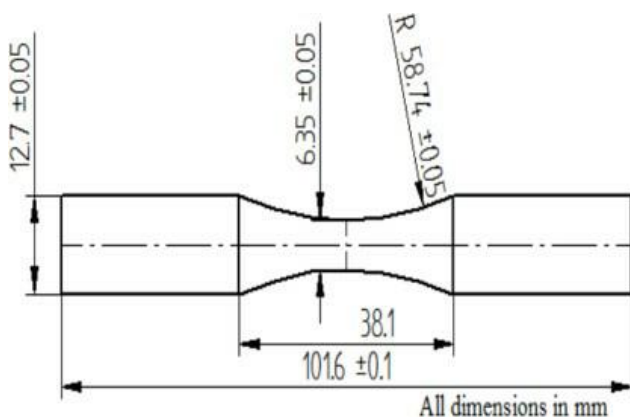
ASTM standard fatigue test specimen is ASTM E606 with specified tolerances
